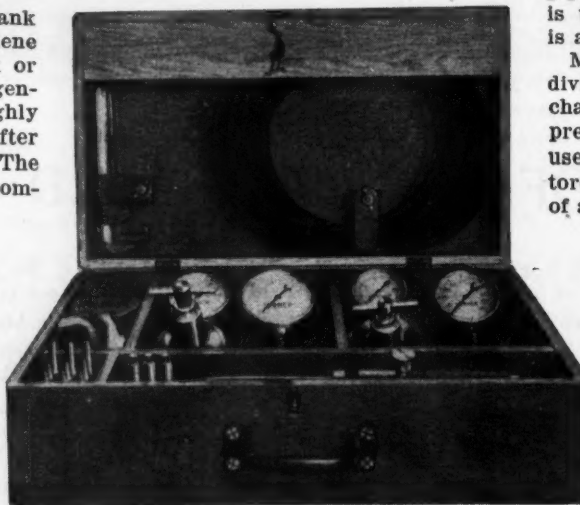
Here is a welding outfit complete except for oxygen and acetylene tanks. The equipment includes a torch, an assortment of tips, fluxes, acetylene and oxygen regulators and gages, and hose. This equipment lists at \$150
